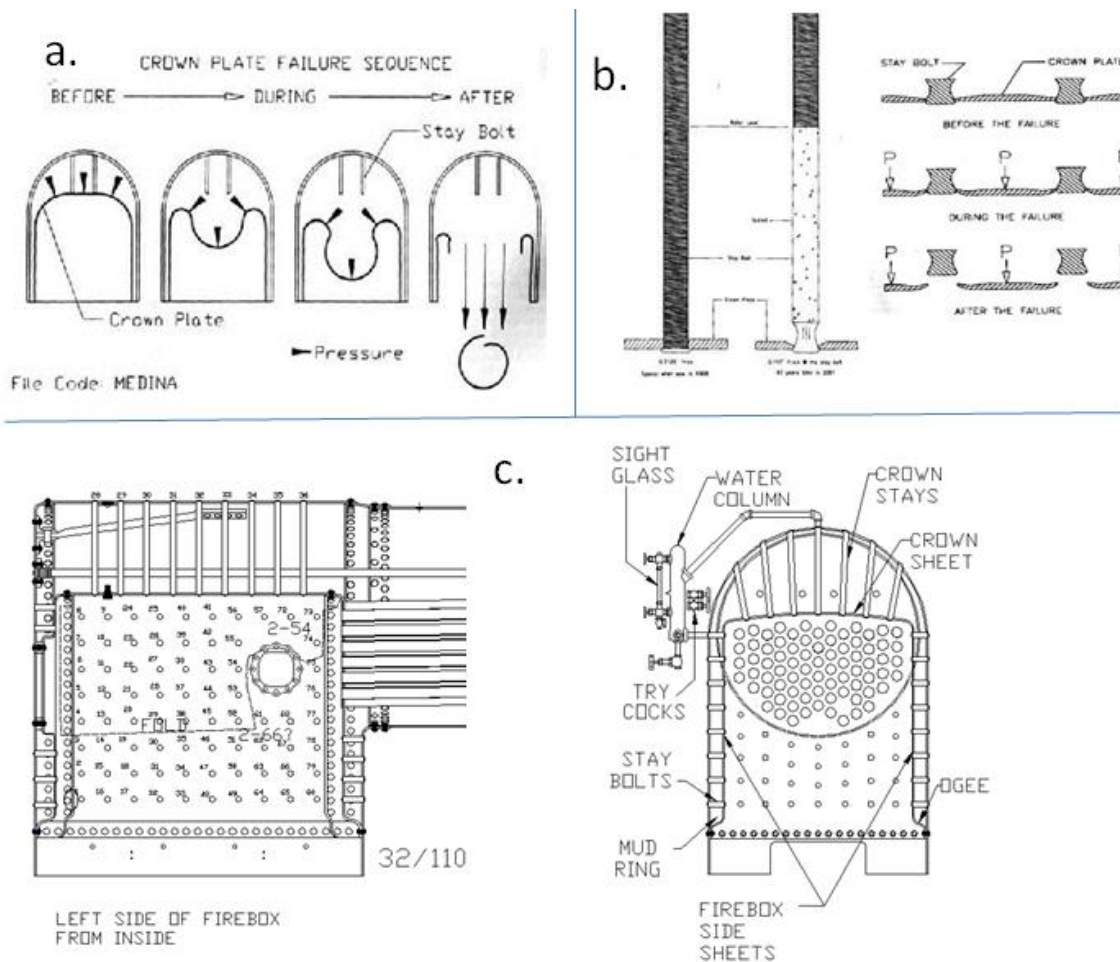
Various schematics and detailed drawings<sup>2</sup> are included in the executive summary including, a) sequence of failure for crown plate, b) corrosion details of stay bolts and crown plate, c) detailed CAD drawing showing the failure line where crown plate separated from firebox
